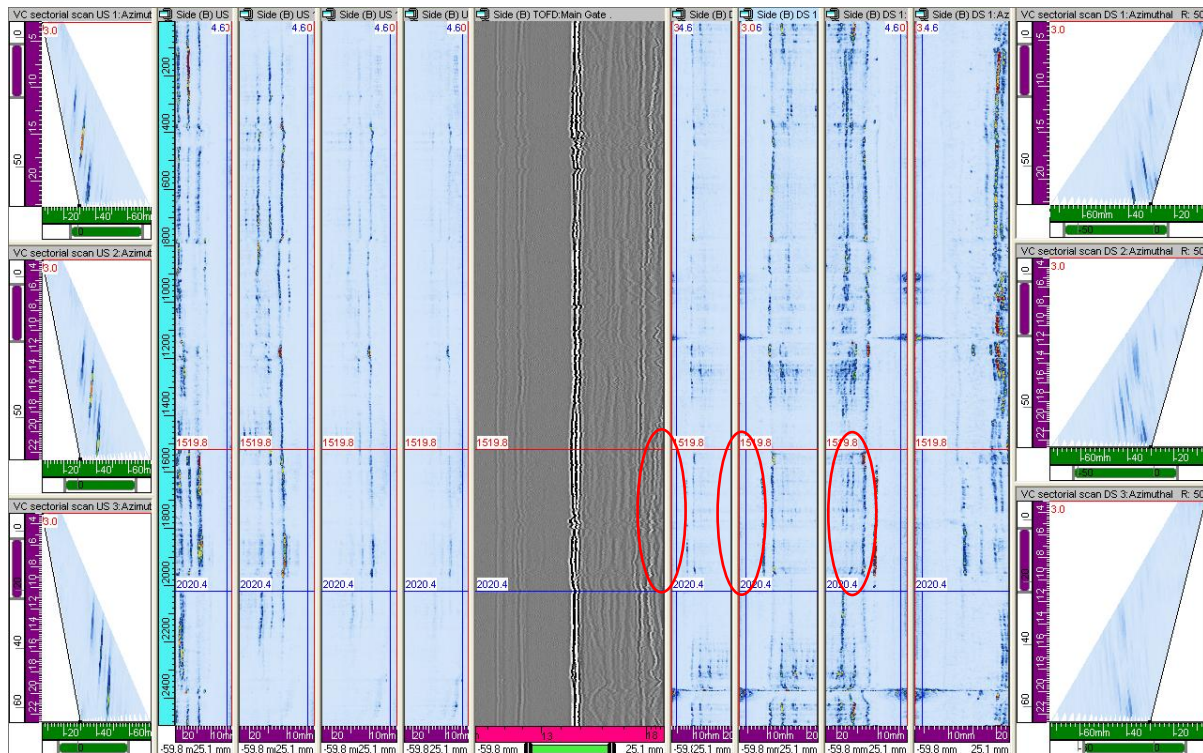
Weld MLA 4895 - EWI LPA Scan Screen Capture 1
